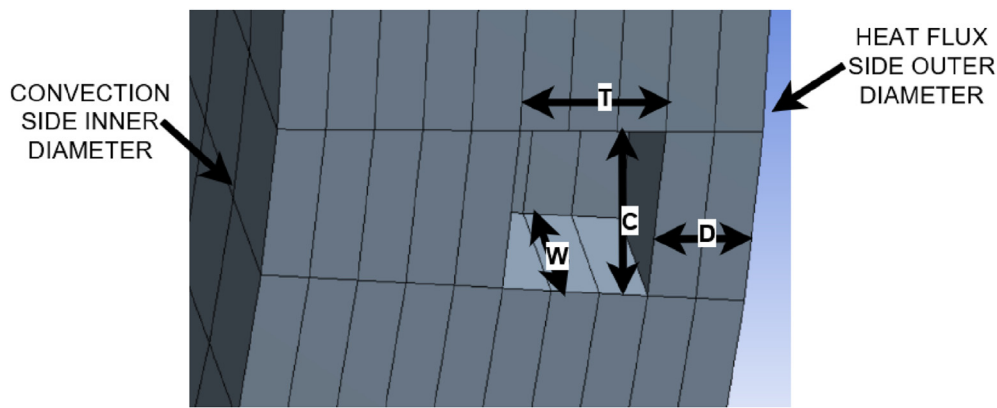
Section view of pipe with rectangular shaped embedded defect.
